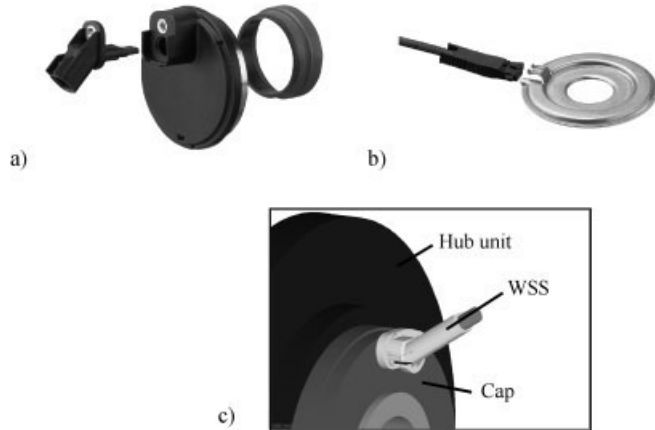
a) Cap sensor consists of direct connected wheel-speed sensor, cap, and multipole tone wheel; b) clip sensor with depending fixture (without screw); c) cap-ring sensor
